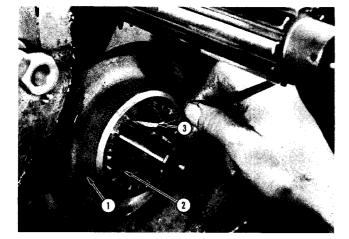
REMOVING KEY 1. Gear 2. Thrust Washer 3. Key
